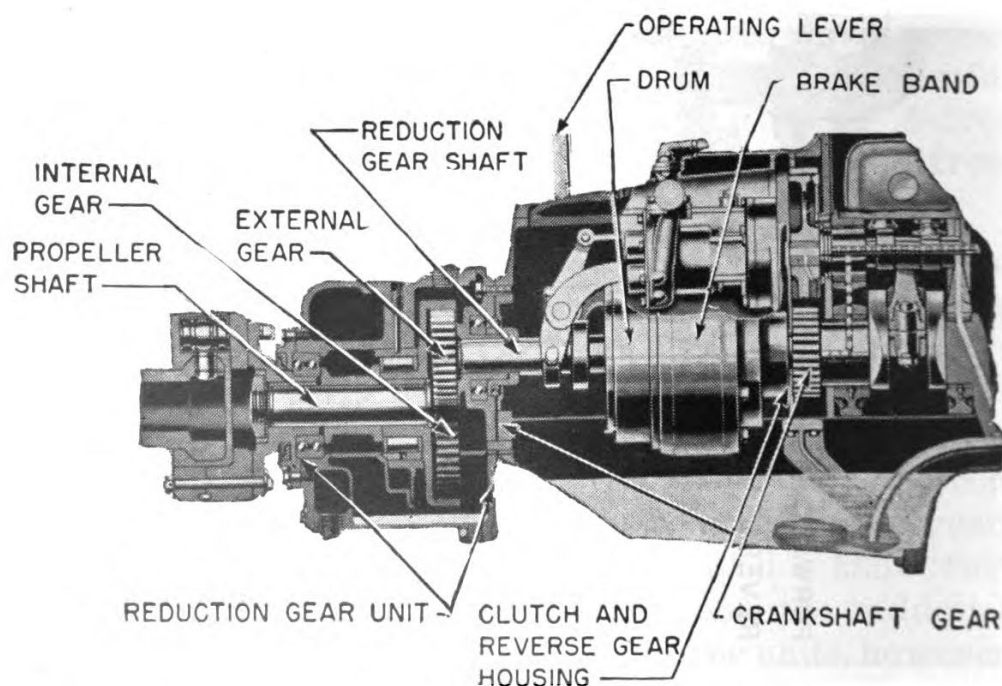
Clutch and reverse-gear assembly with attached reduction-gear unit.
